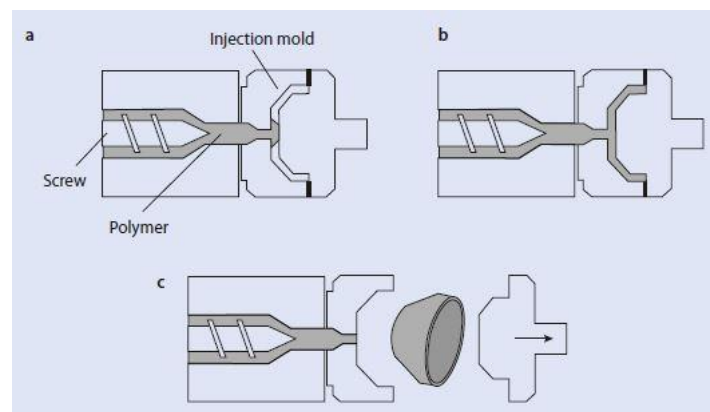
Simplified injection moulding process. (a) Start of the polymer melt injection. (b) End of the injection. (c) Demoulding and ejection [3]
